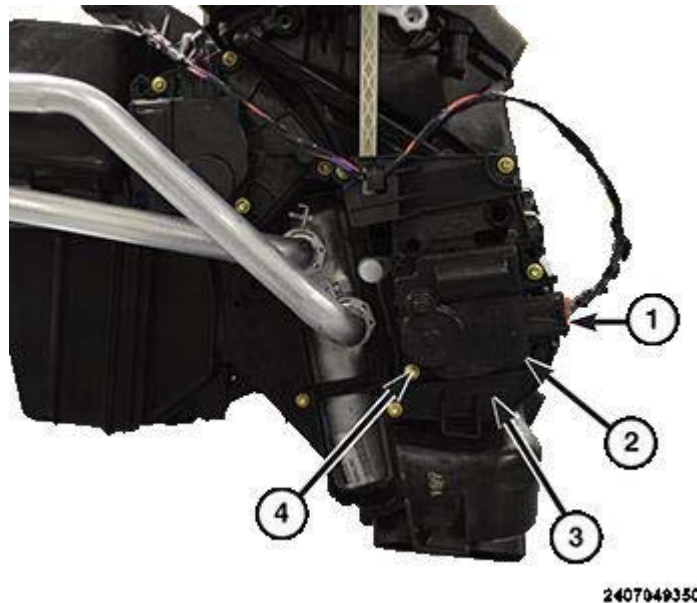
HVAC Wire Harness Connector, Screws, Bracket & Mode Door Actuator
